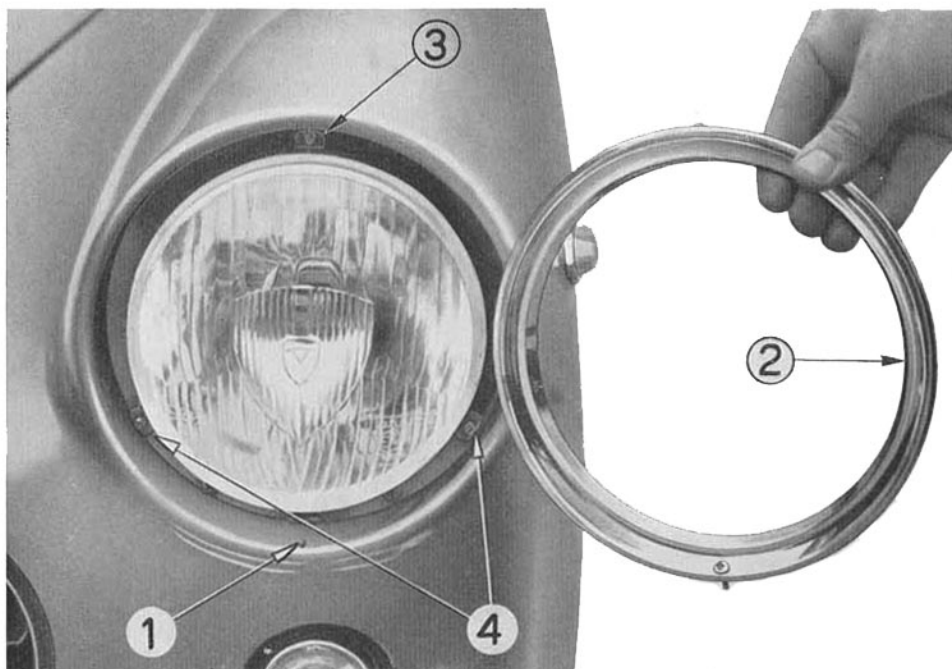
Front lamps : 1) rim fixing screws ; 2) Rim ; 3) Adjustment screw for the beam in vertical direction ; 4) adjustment screws for the beam in horizontal direction.
